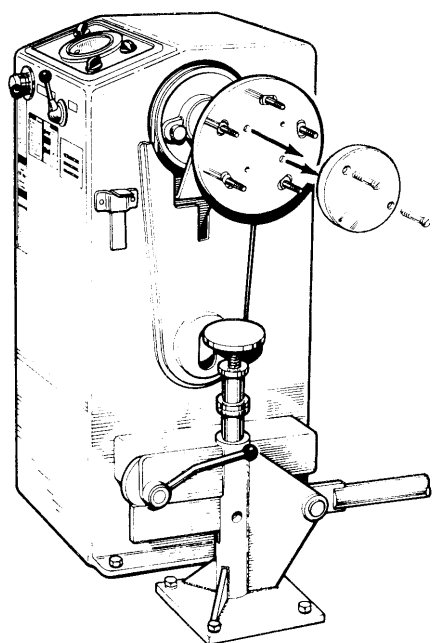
HORIZONTAL TYPE OF BALANCING MACHINE WITH ADAPTER FOR SPIGOTTED WHEELS
